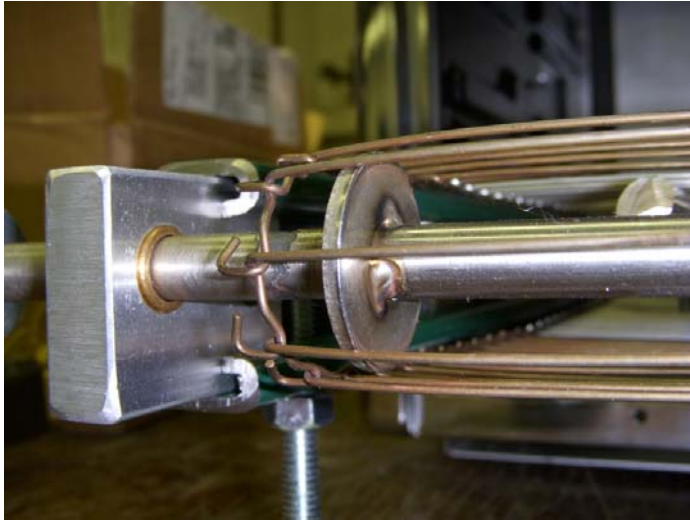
Driving shaft in a brass bushing inside one of the front aluminum blocks.
